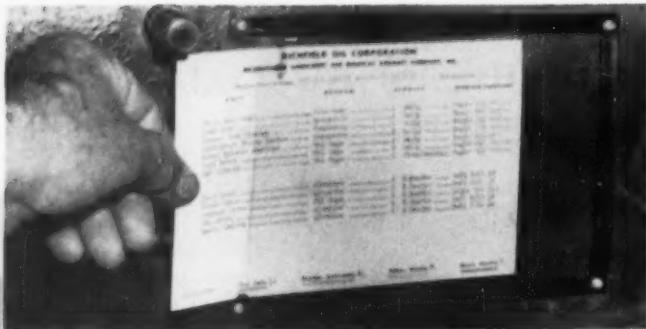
A lubrication card detailing lubrication requirements and frequencies is kept in a cellophane holder on each machine.
